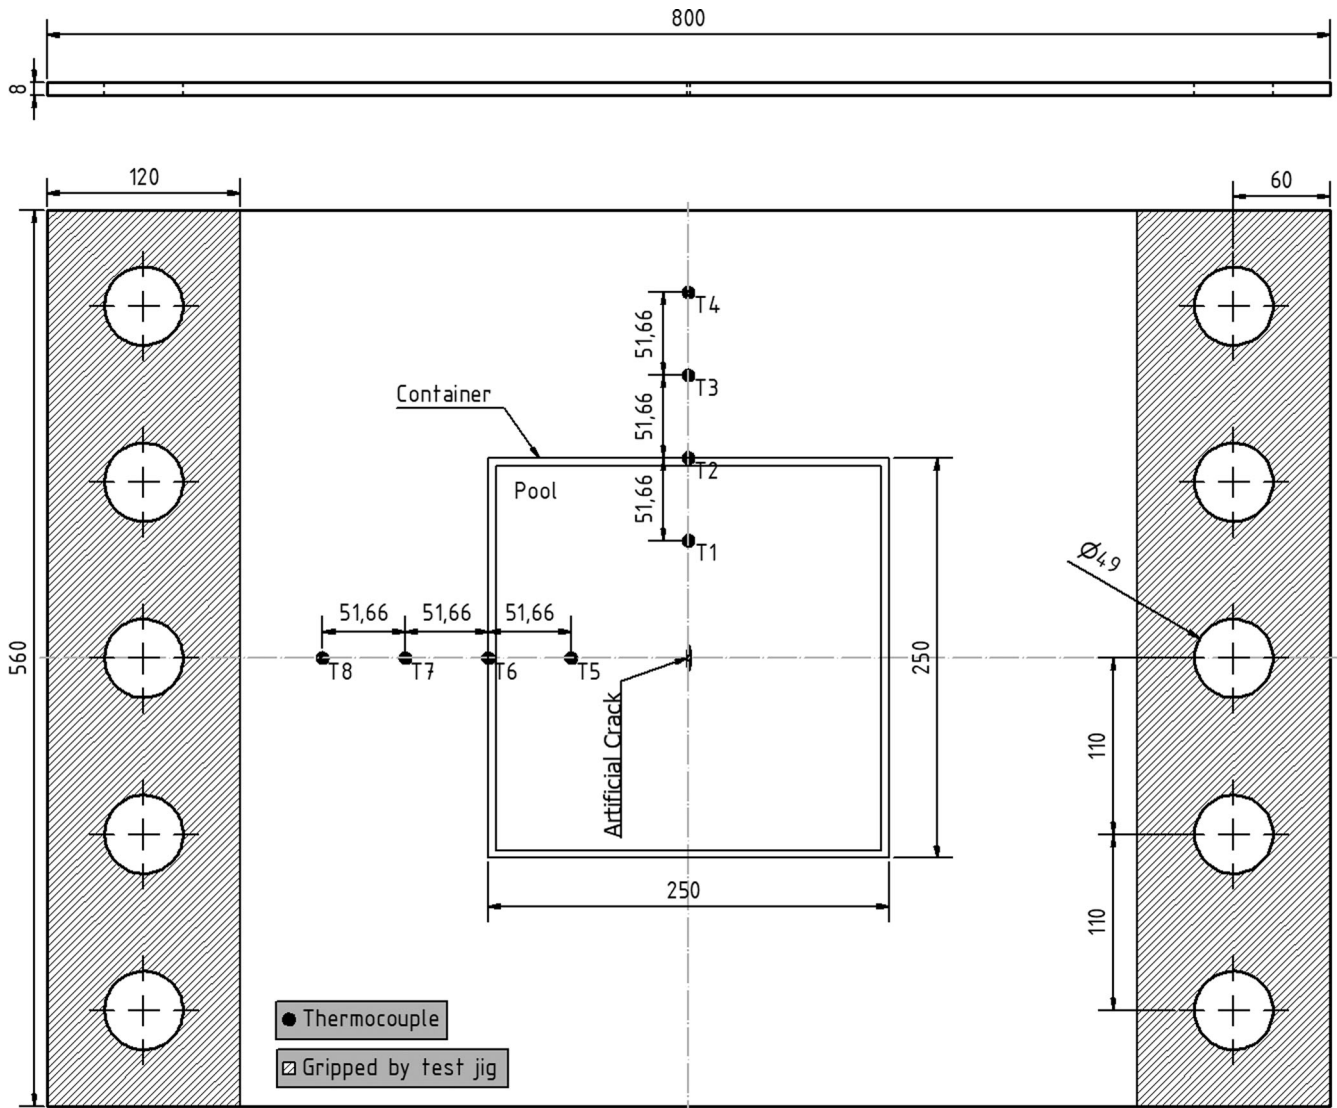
Specimen and container dimensions together with the location of thermocouples.
